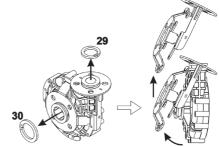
E - Disassembly of the protection flange for the flanged execution
